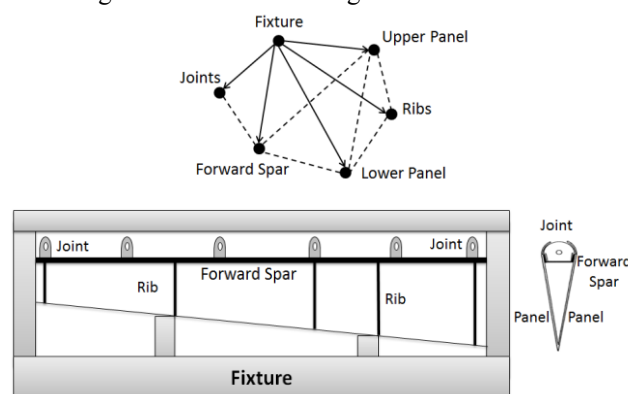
DFC of the composite elevator assembly and its assembling fixture.
